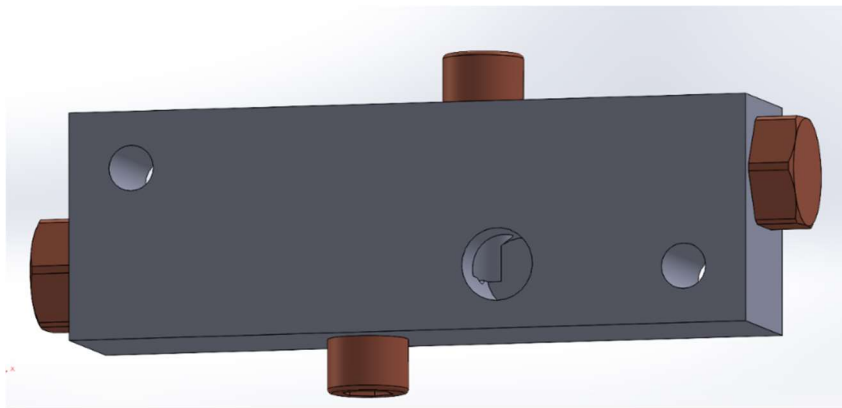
Isometric view of 1L22 dual pressure relief valve
